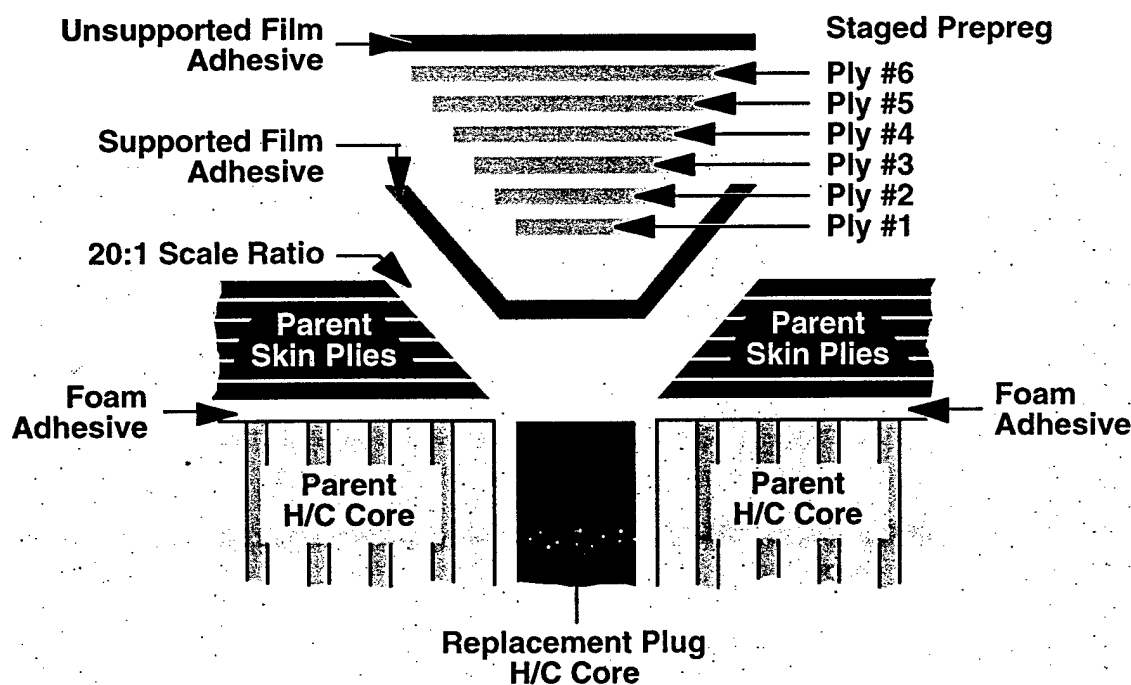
This configuration of a one-sided skin and core repair is currently bonded and cured using a heat blanket [40].
